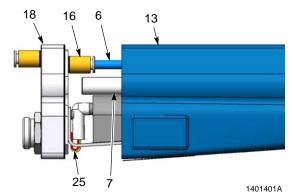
Connecting Air Tubing and Installing Heat Sink in Housing
